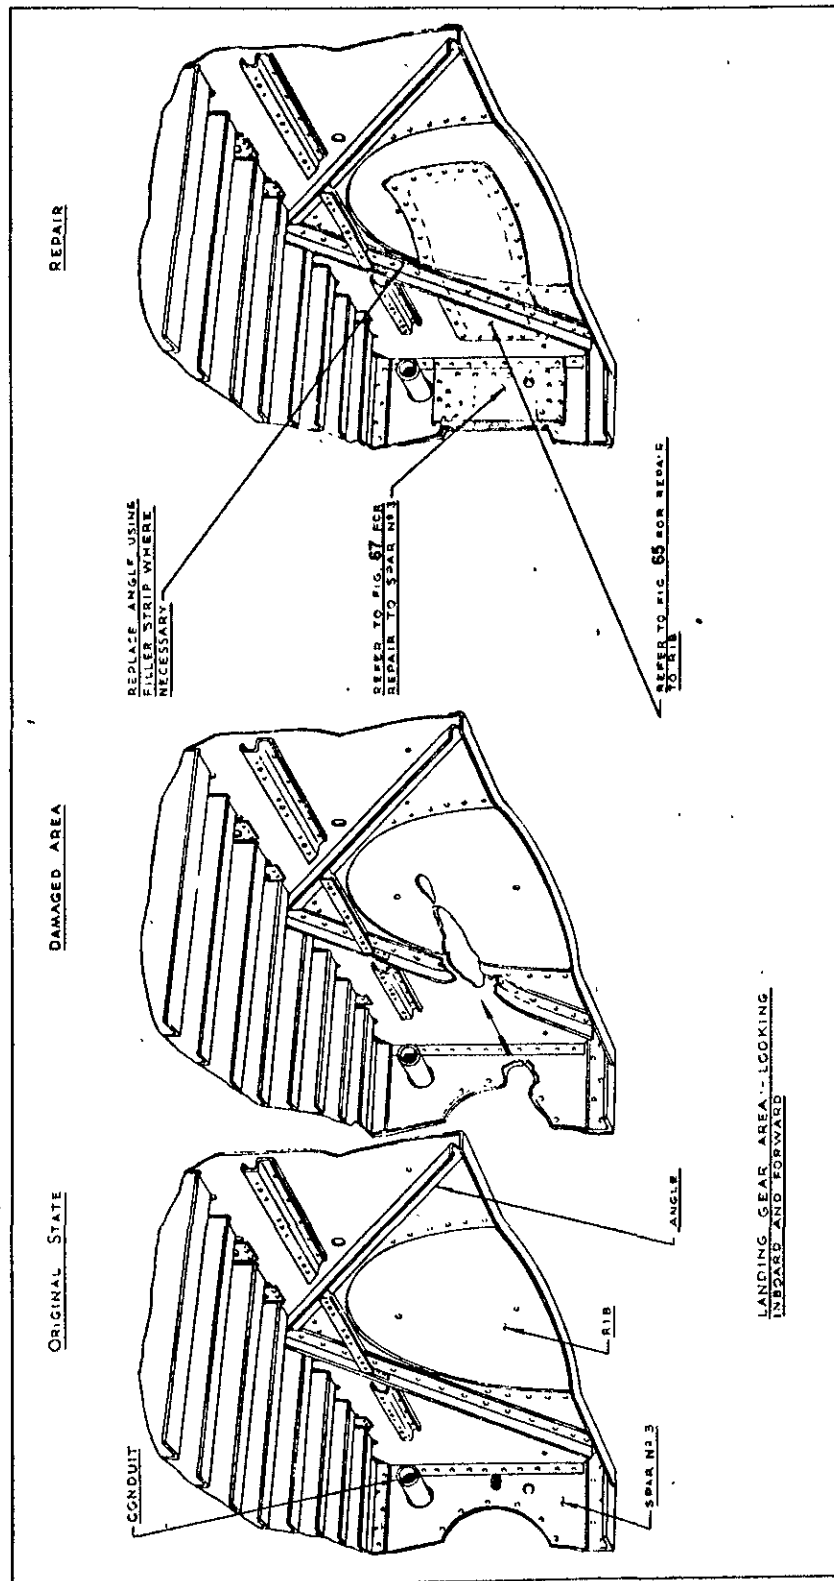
Wing - Rib and Spar No. 3 Damage - Sta No. 27
